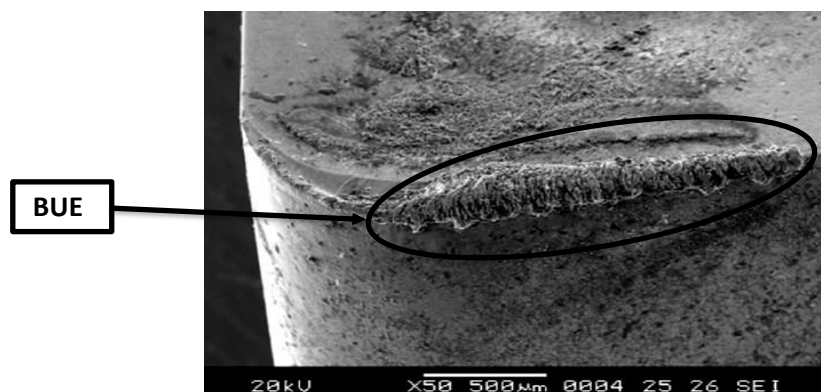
3 Build-up Edge (BUE) at cutting tool edge (70)
